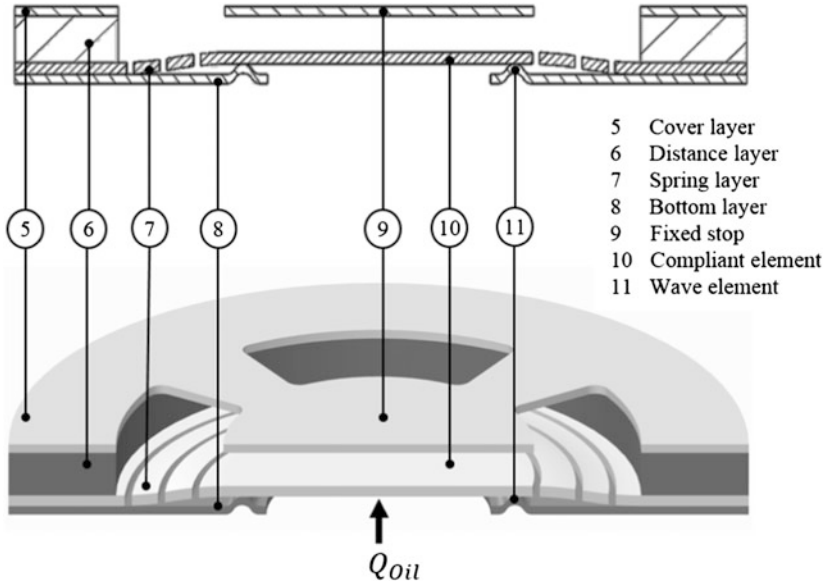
Top section drawing of the valve with layer descriptions; bottom 3D section view
